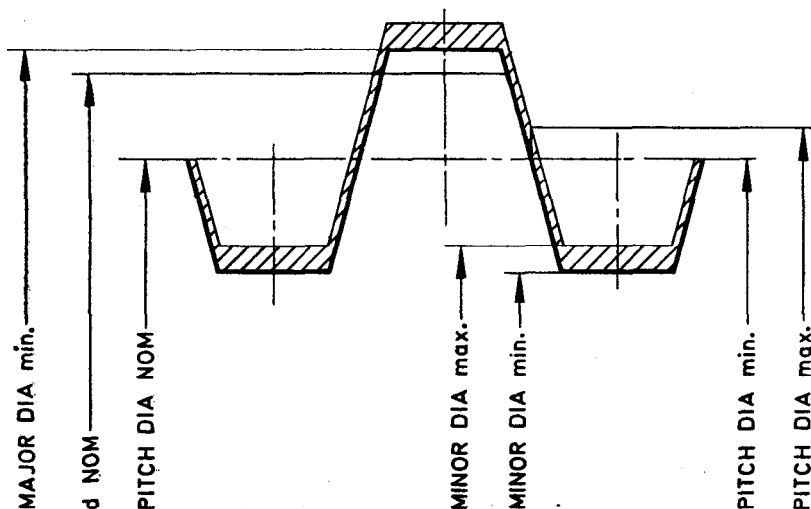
INTERNAL THREADS WITH TOLERANCE POSITION H
